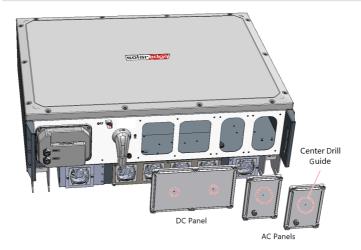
AC and DC panels with center drill guides at the bottom of the inverter
